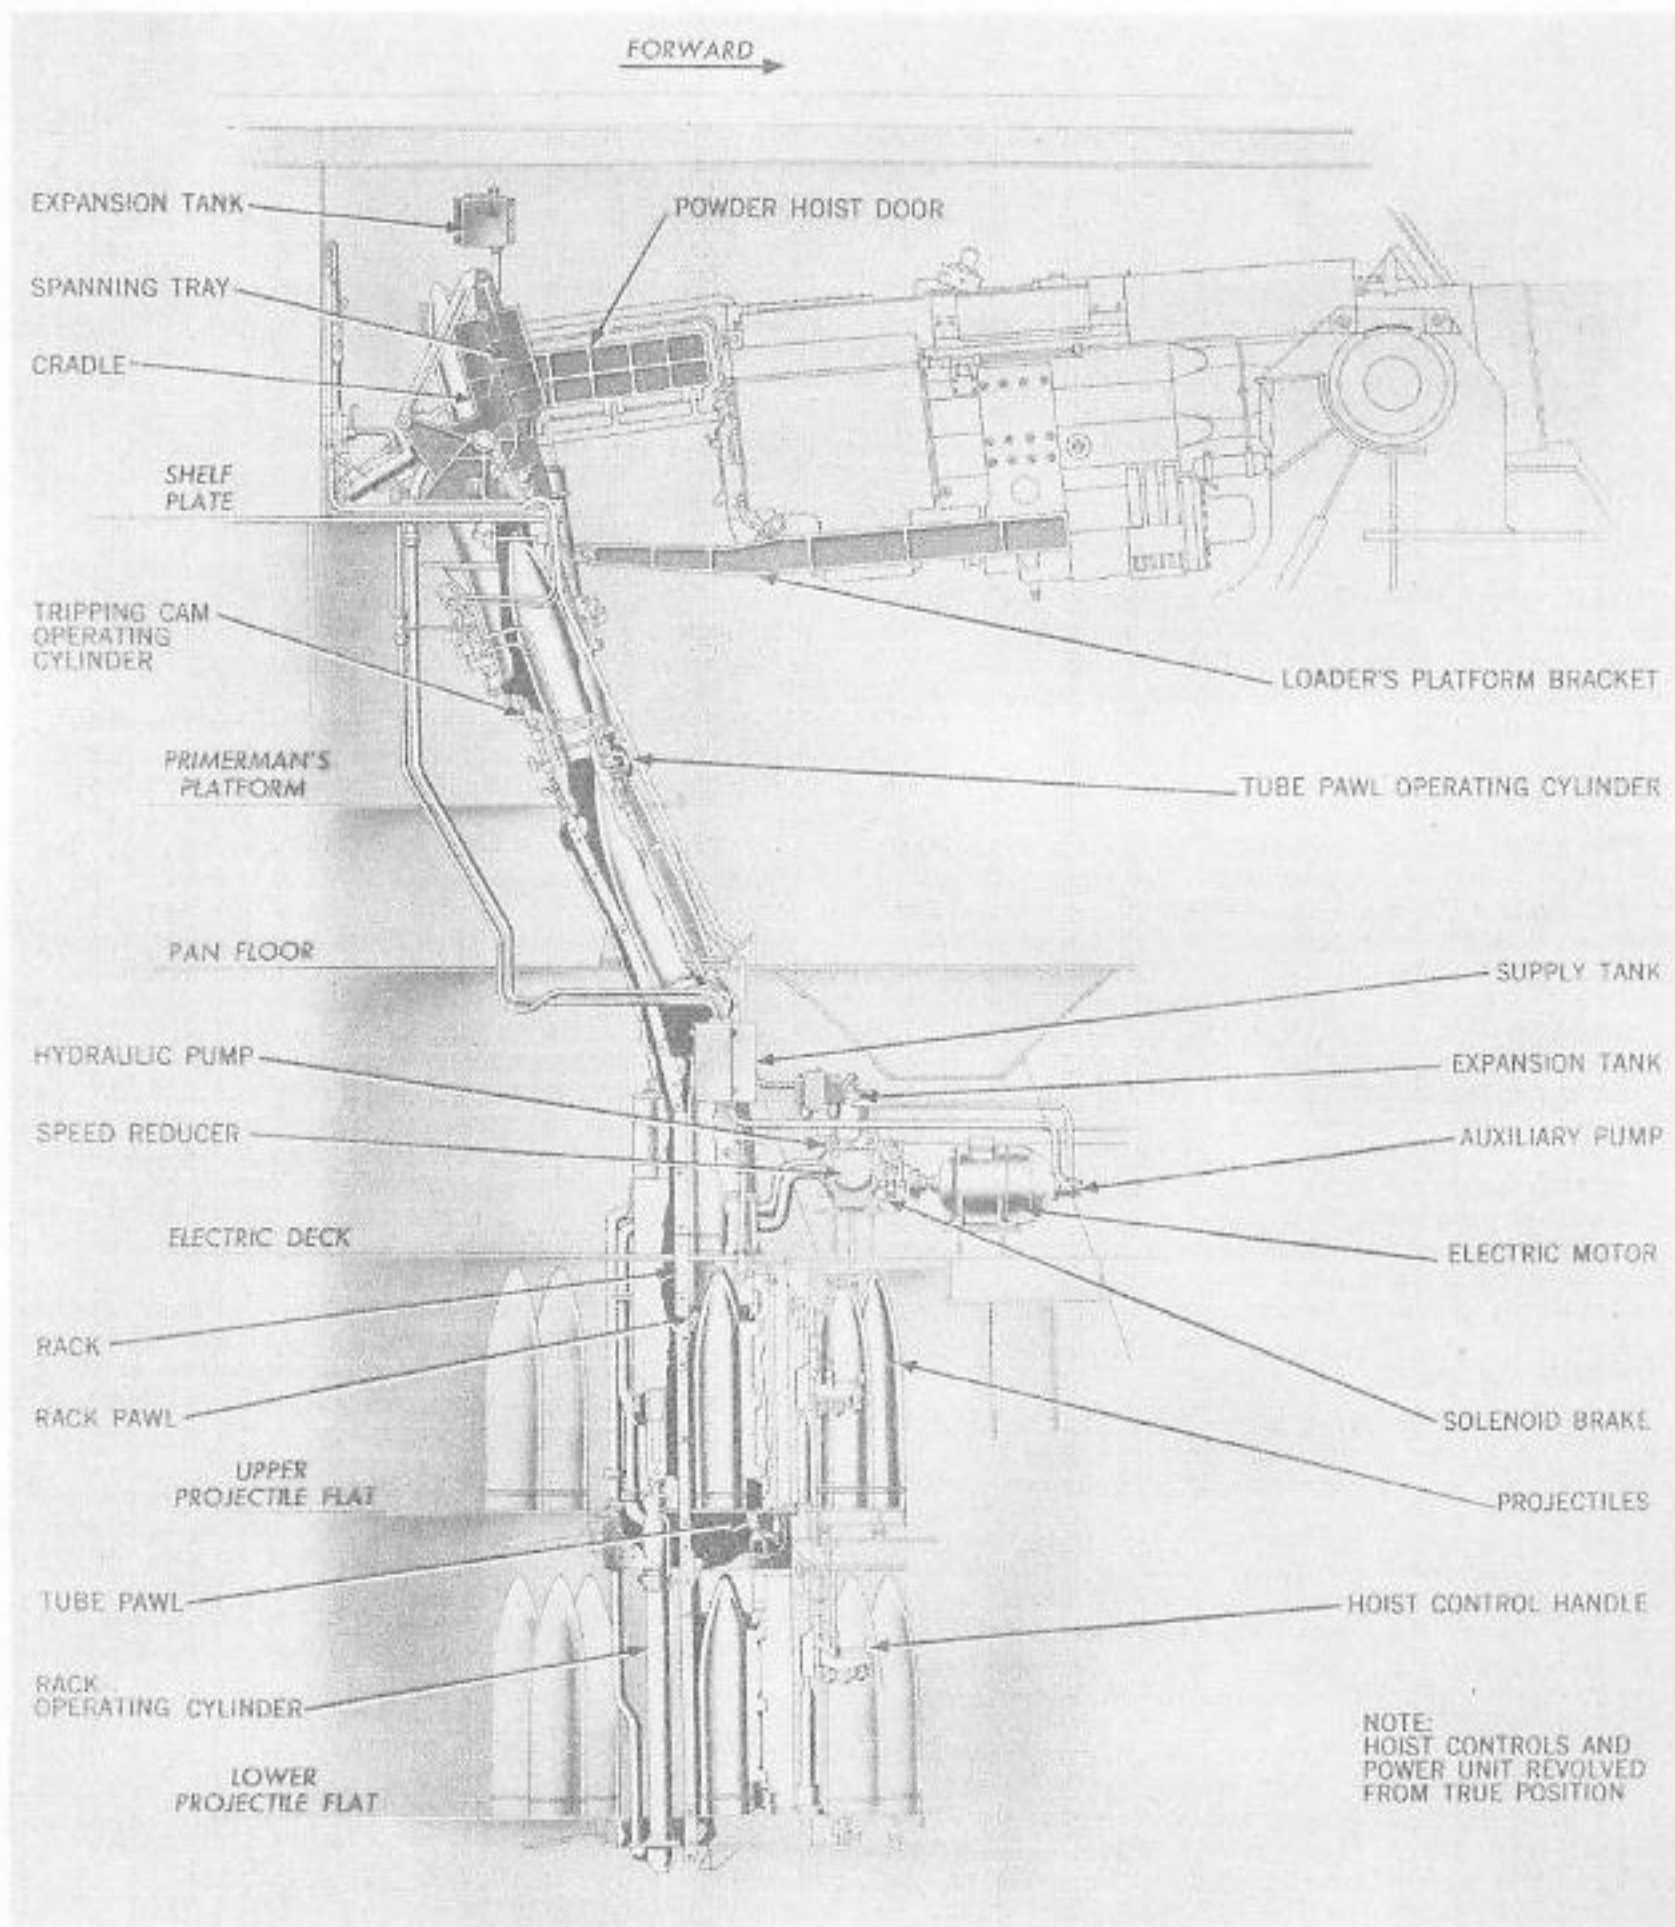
16-Inch Projectile Hoist Mk 8 Mod 0 - General Arrangement, Sectional View
